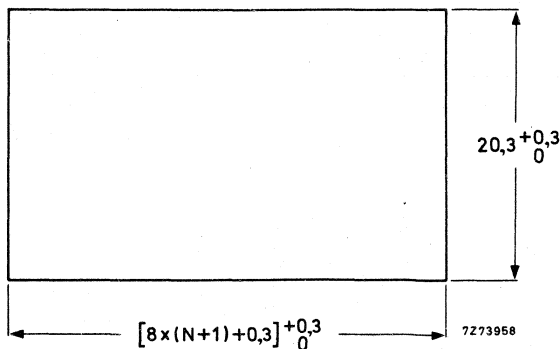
Panel cut-out for switches and end-pieces with brackets.
